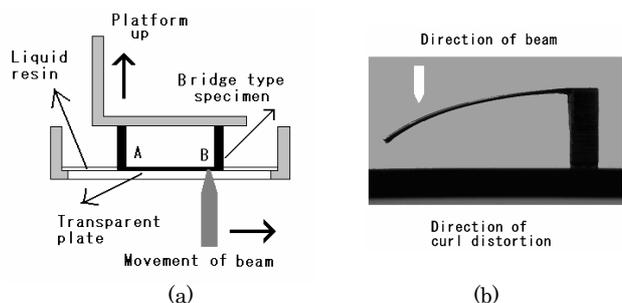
Machine E-DARTS as COLAMM system. Cantilever specimen (b) is set upside down after cutting a corner A or B of bridge type specimen (a).
